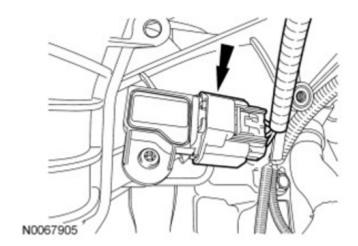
Locating Manifold Absolute Pressure Sensor Electrical Connector Courtesy of FORD MOTOR CO.
